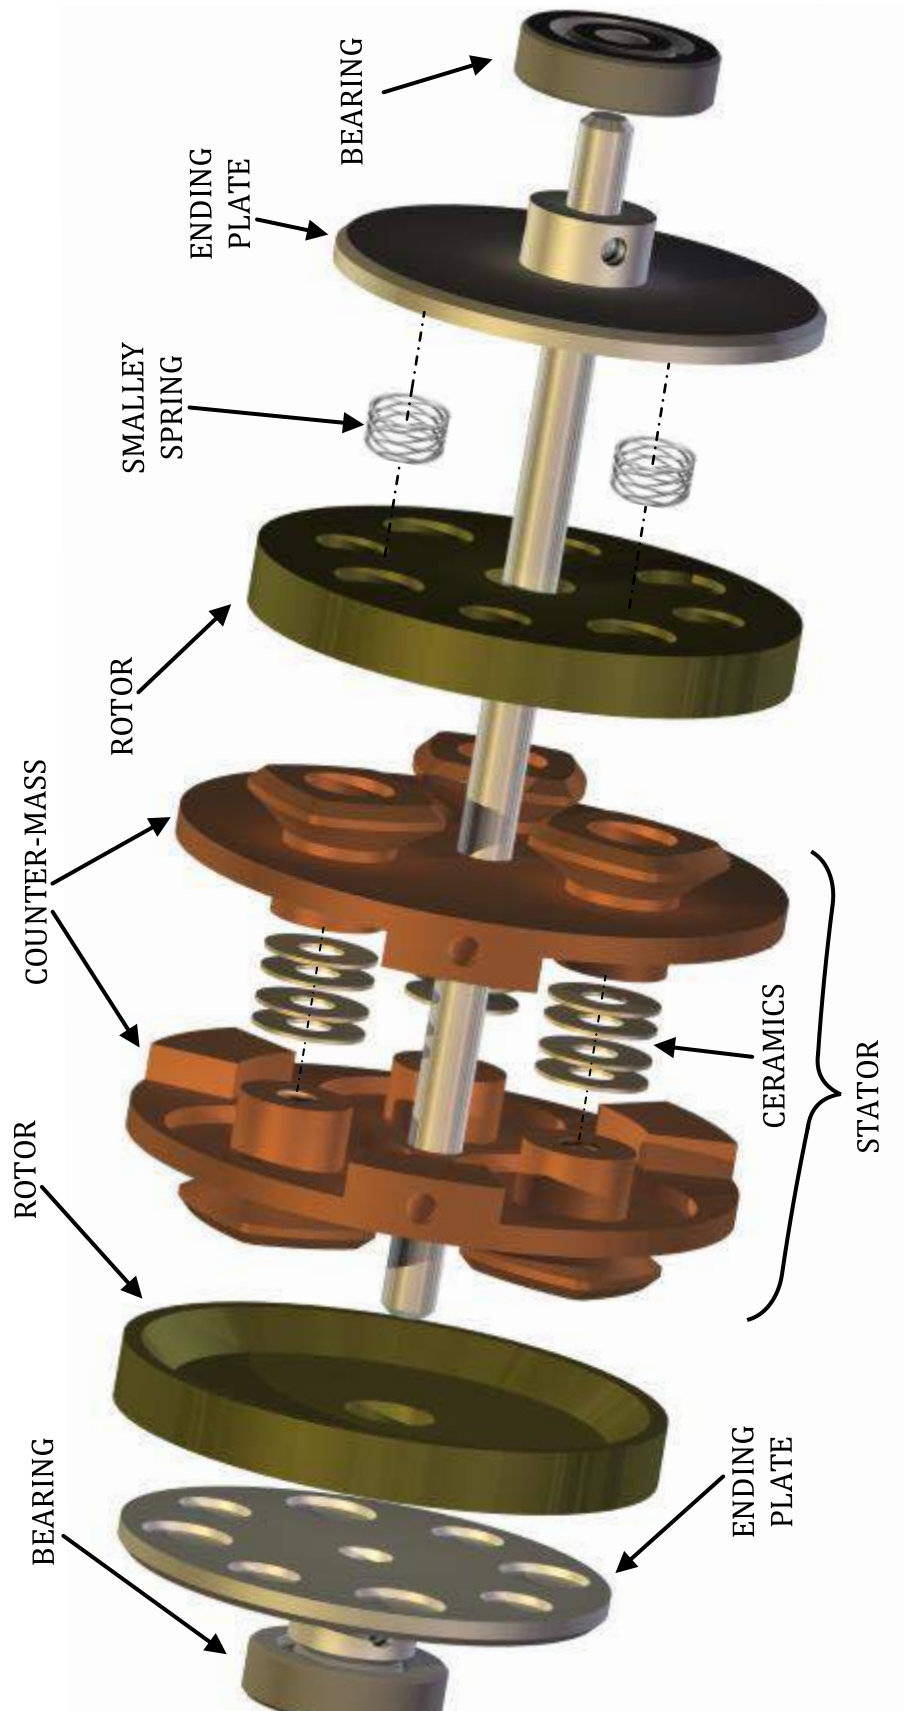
The exploded view of the prototype multicell piezoelectric motor
